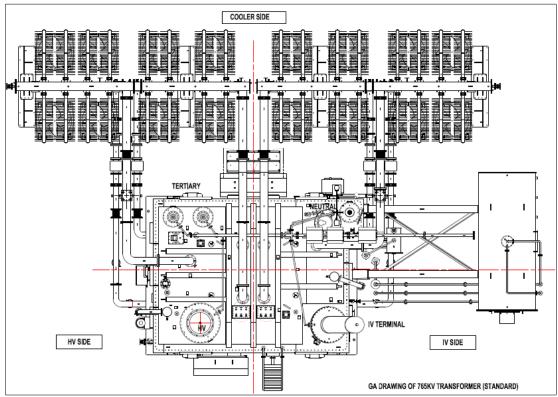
(Typical standard GA drawing of 765kV Transformer)
